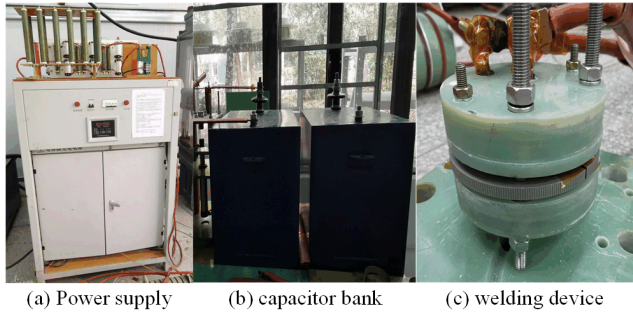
Electromagnetic pulse welding equipment.
